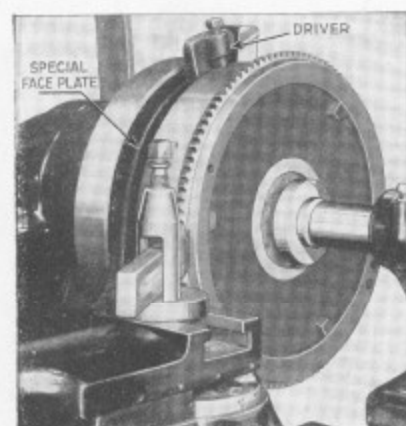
Close-up of a Flywheel Being Machined for New Starter Ring Gear.
